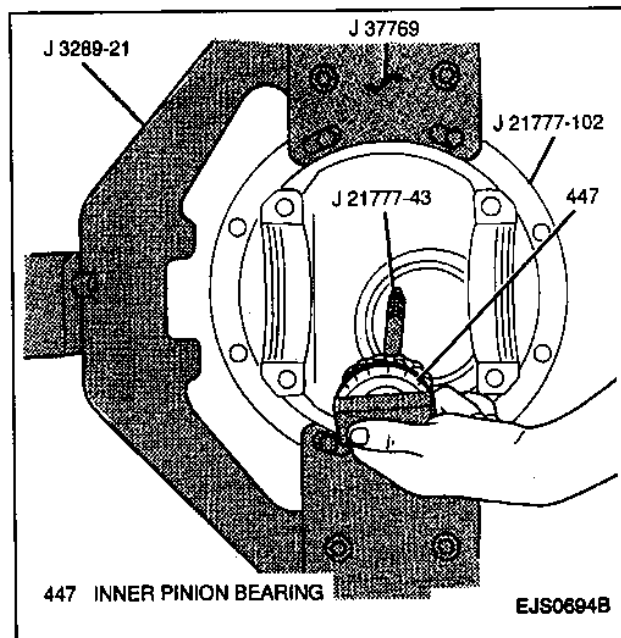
Installing Inner Pinion Bearing With Gage Block and Stud
